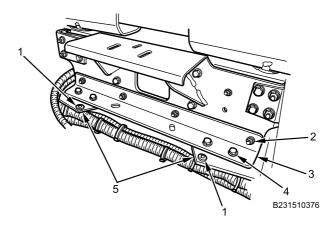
Lower Radiator Crossmember and Button-Head Cable Lock Straps.
